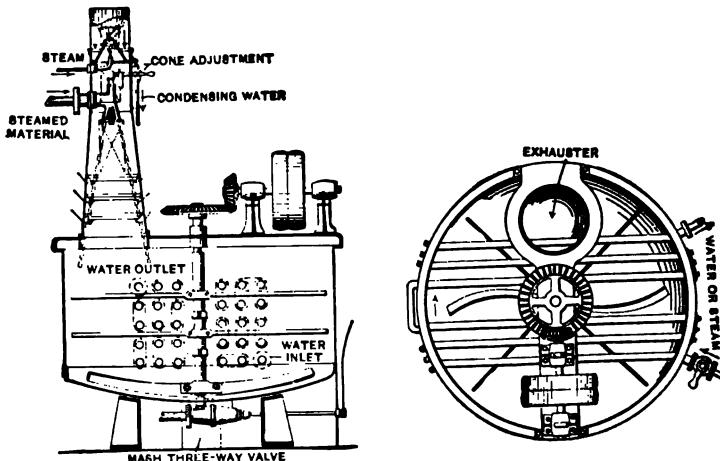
ELEVATION AND PLAN VIEW OF BOHM'S MASHING APPARATUS.
